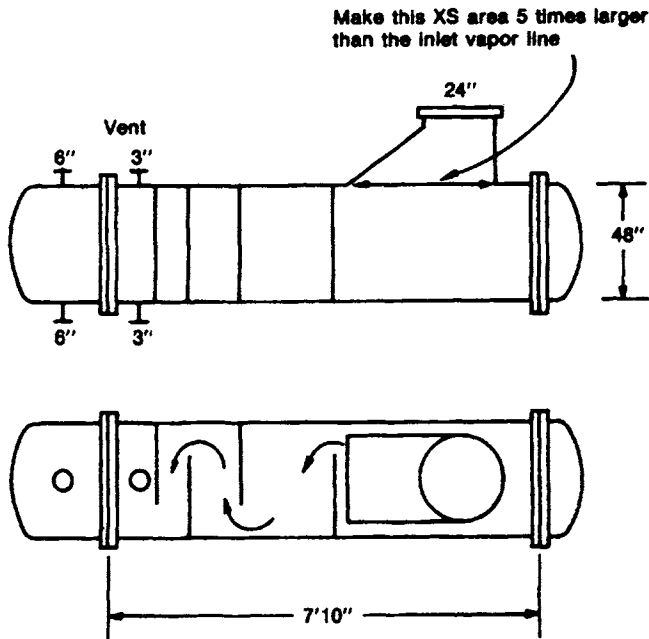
Baffling and inlet "bathtub" are shown in this typical vacuum condenser design.
